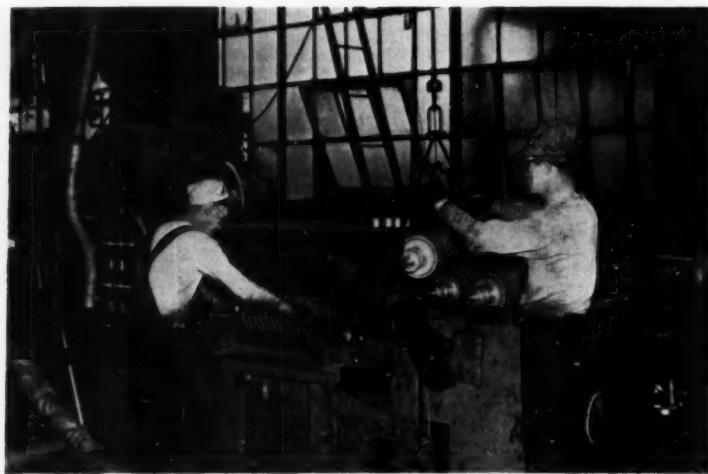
MACHINE FOR SHOTPEENING GEARS IN PRODUCTION
